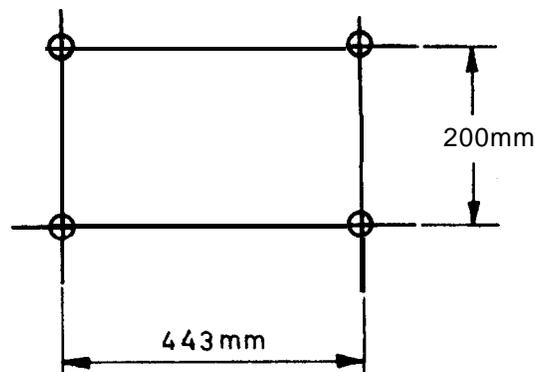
MOUNTING FOR POWER SUPPLIES 1236/2260
